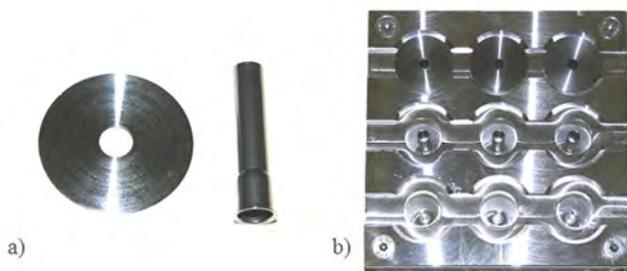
Parts of dummy testing sample (a) and sample mounted in welding fixture (b)
